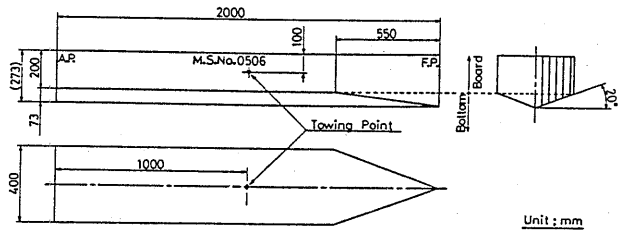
(d) Models of Planing Craft with Longitudinal Stripes ⁶²⁾
